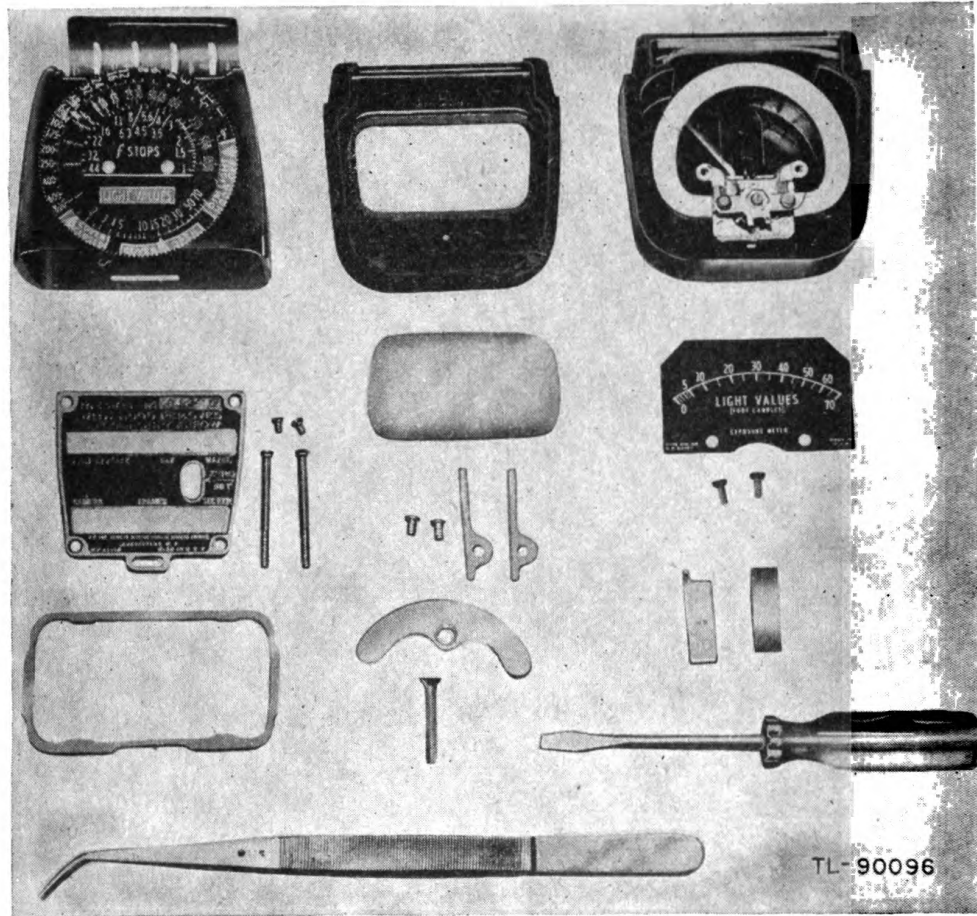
Exposure Meter PH-77-C General Electric DW48, completely disassembled.
